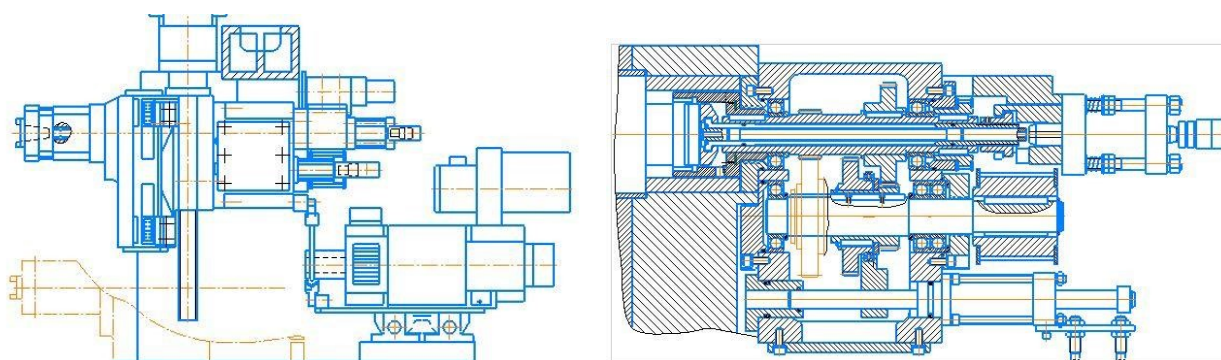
Layout of the machine MC 4V drive: a) general view; b) longitudinal drive layout
